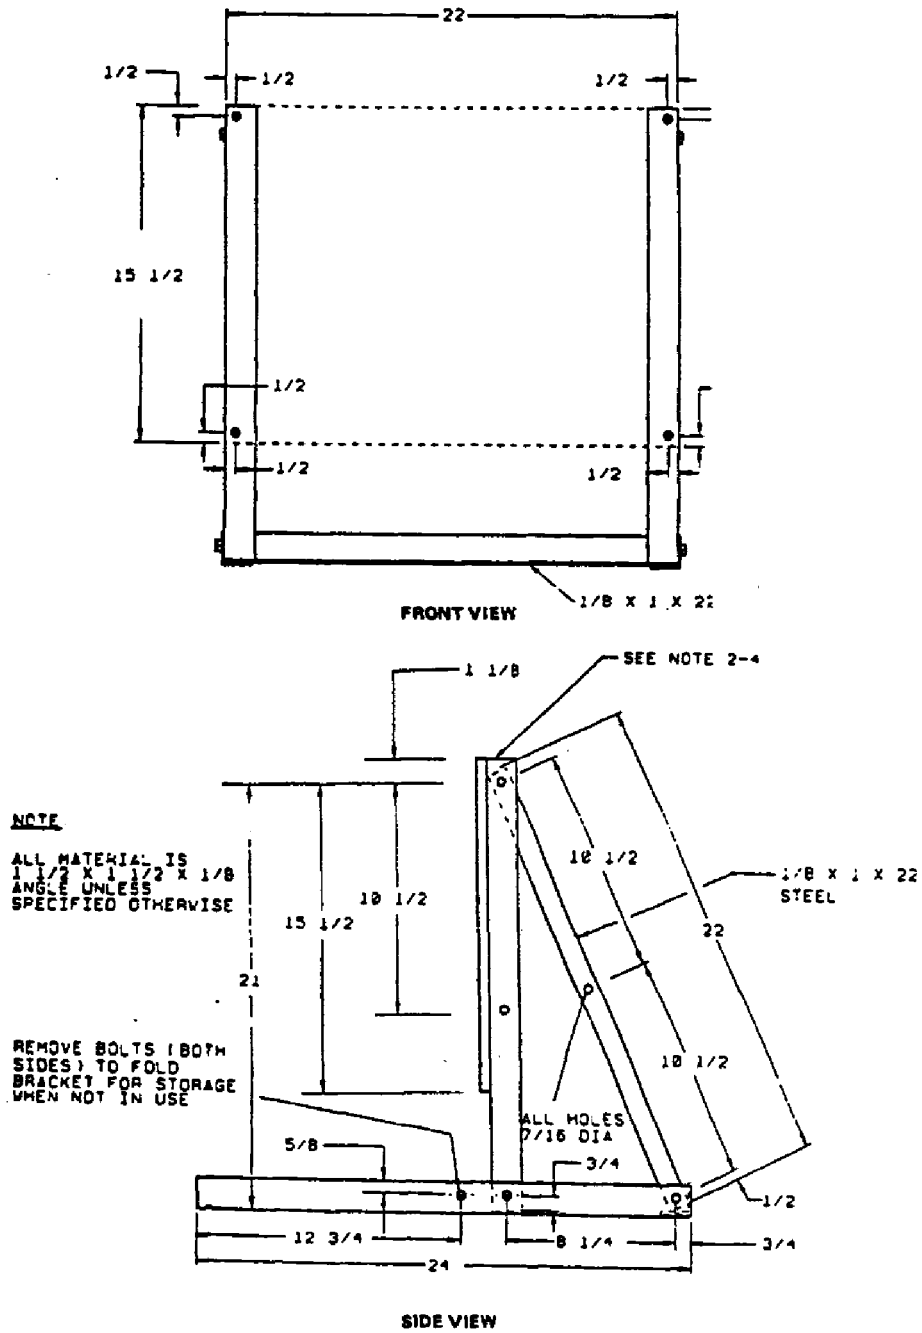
Automatic Combustion Control Calibration Panel Drawing (Sheet 8 of 13)
